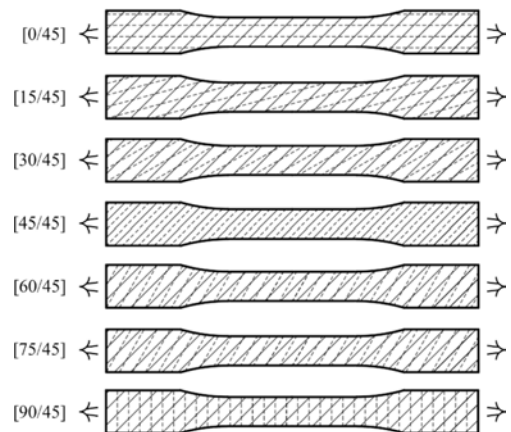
Schematic drawings of 3D printed specimens for asymmetric tool paths based on 45° tool path (A/45°).
